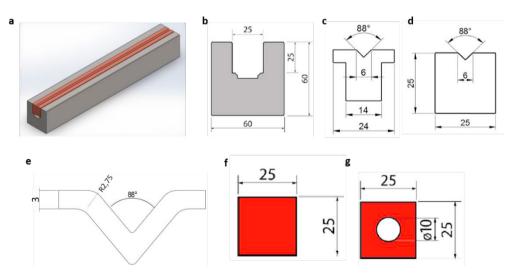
(a) Air bending rapid die concept made of a standard metal casing and a rapidly interchangeable polymeric v-shaped insert; (b) crosssectional drawing of the metal frame; (c) nylon insert dimensions; (d) polyurethane inserts dimensions; (e) polycarbonate inserts dimensions; (f) and (g) rubber inserts dimensions.
